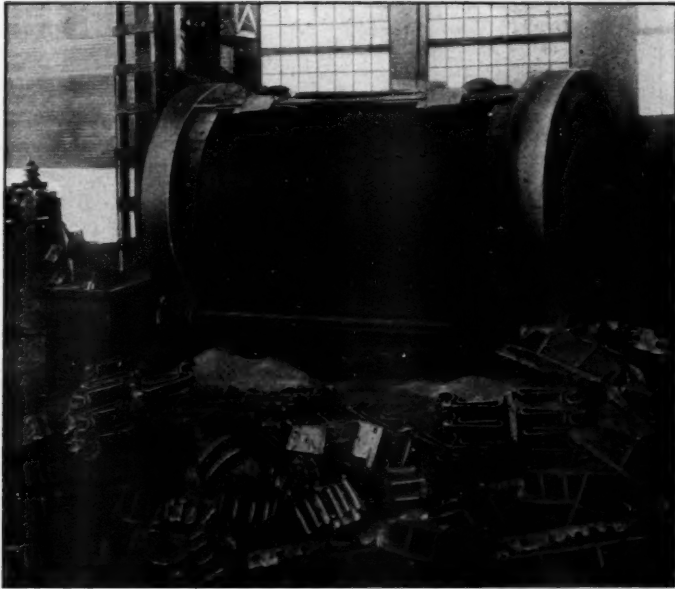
LARGE TUMBLING MILL OF SPECIAL DESIGN INSTALLED IN A STEEL FOUNDRY
